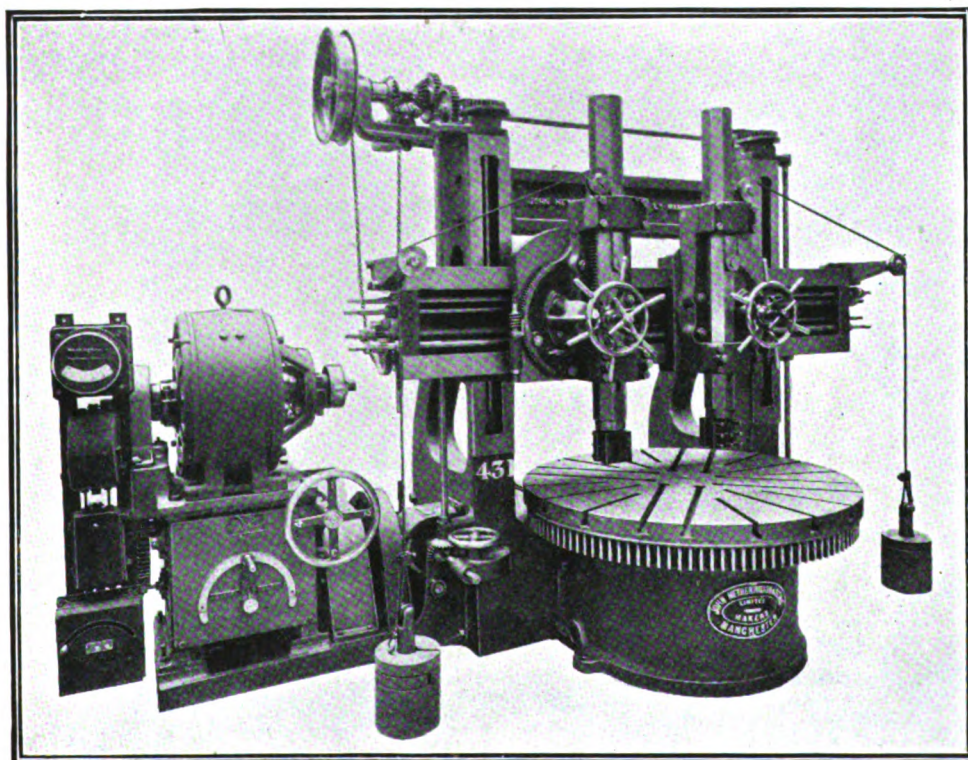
HETHERINGTON HIGH-SPEED BORING AND TURNING MILL.
